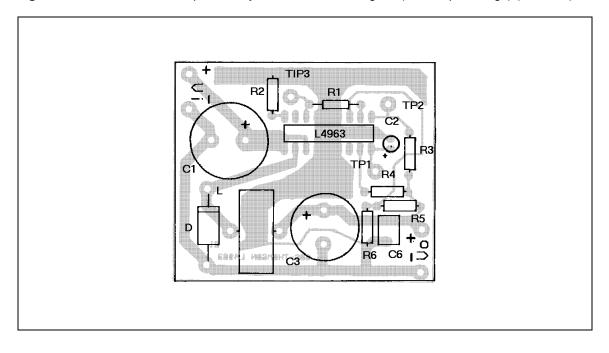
P.C. Board and Component Layout of the Circuit of fig. 26 (Powerdip Package) (1:1 scale).
